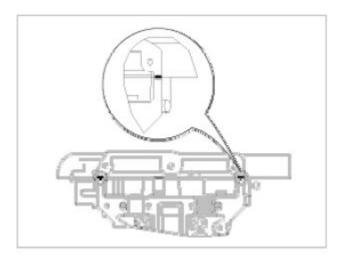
Identifying LH Cylinder Head Cover Sealant Applying Area Courtesy of HYUNDAI MOTOR AMERICA
